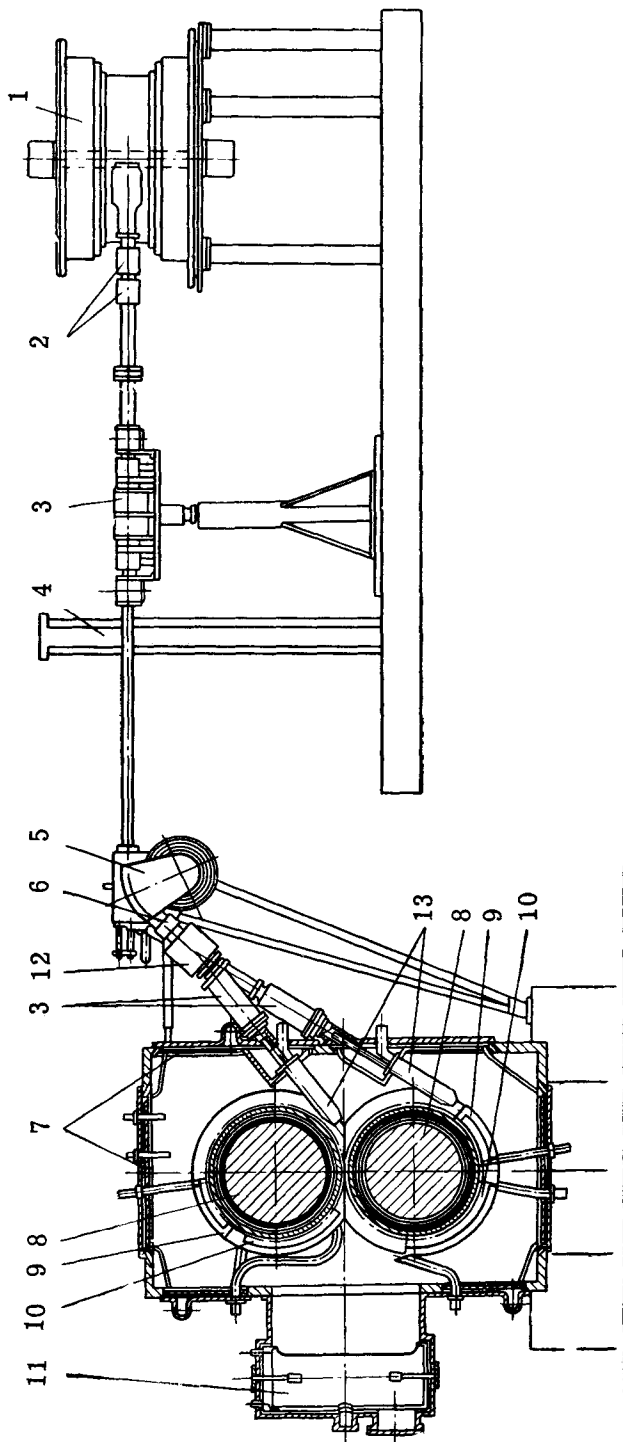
Schematic of arrangement of components in the VEP-1 machine.
